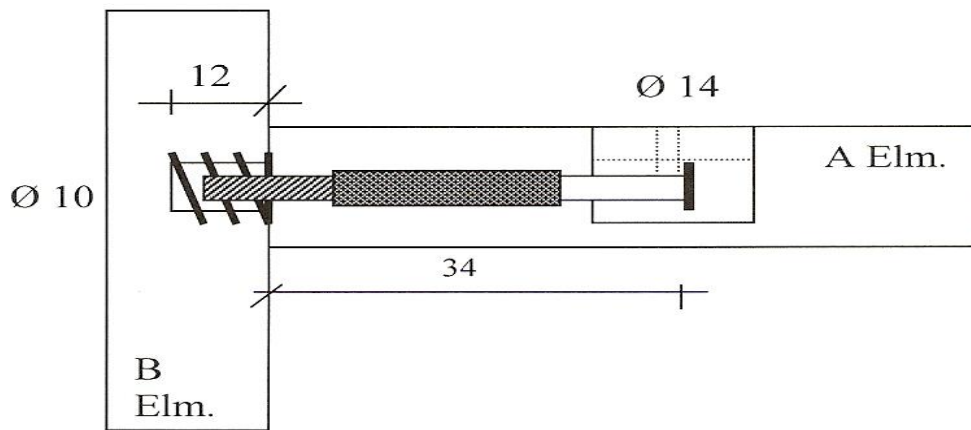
Details of T-type specimen joined with metal minifix (in mm).
